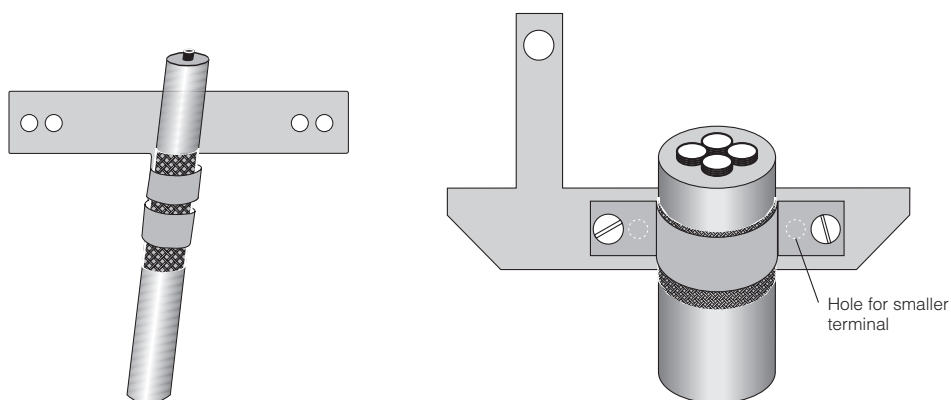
Cable screen connection to mounting parts (mains and motor cables)
